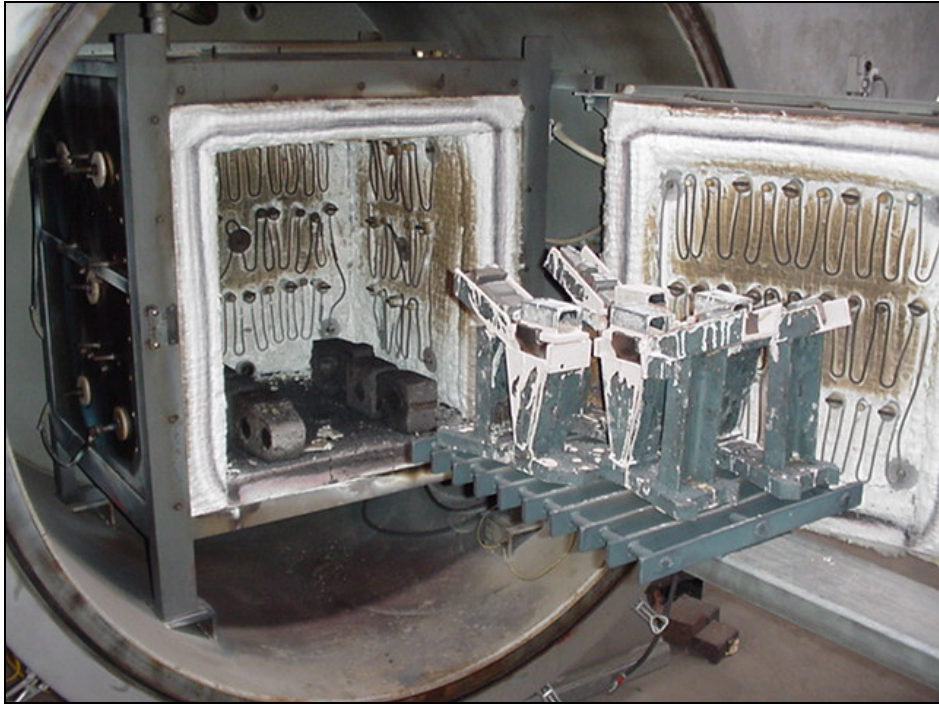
Close up view of hot walled vacuum furnace showing arrangement of steel moulds on furnace tray prior to final placement
